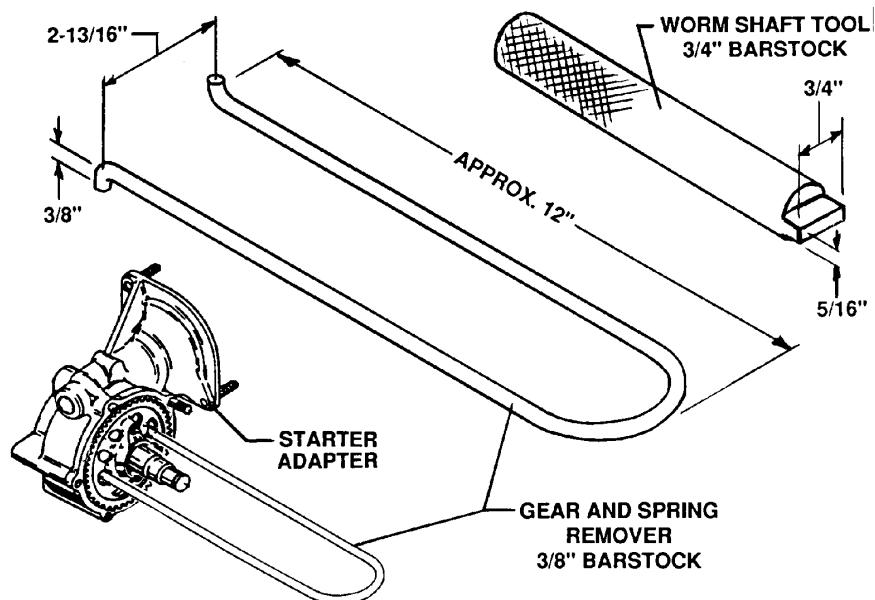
STARTER ADAPTER DISASSEMBLY TOOL
